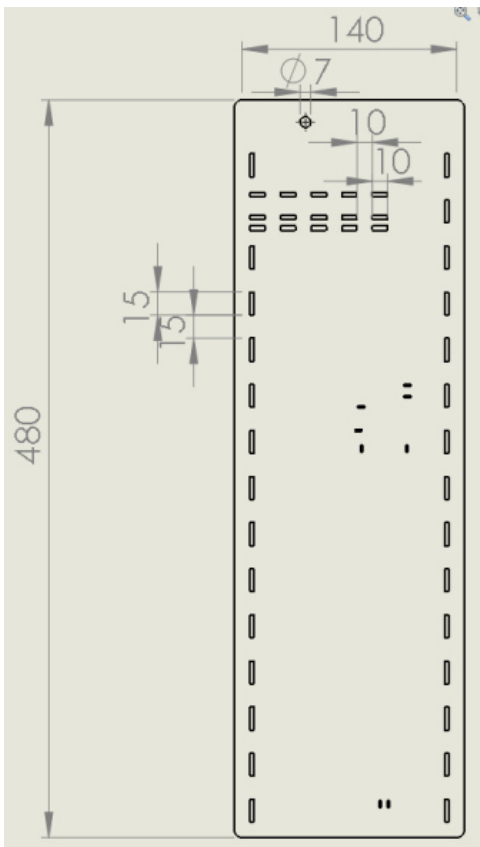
'Testbench platform2'. Testbench mounting for toolhead and digital calliper.
